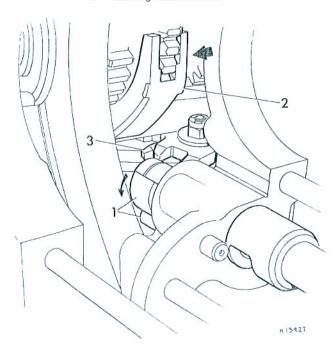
Positioning of selector shaft - rod-change transmission (Sec 4)
